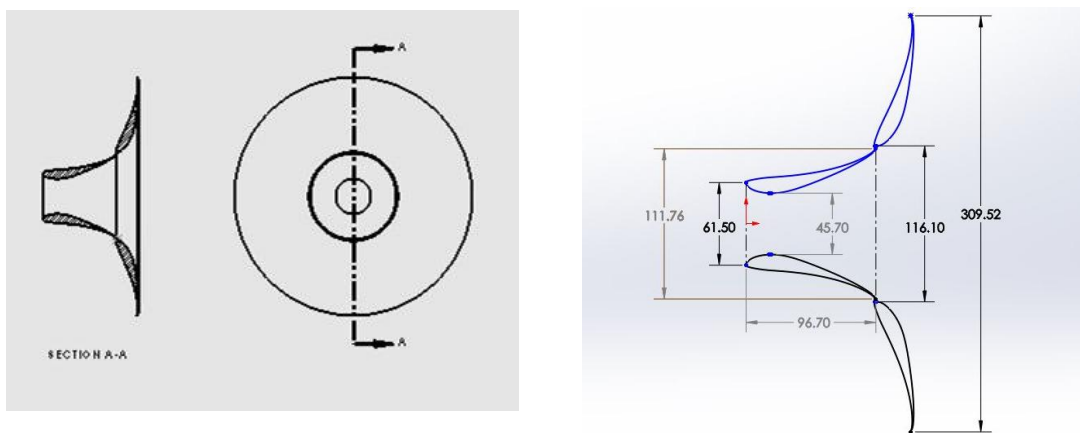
Multi-slot diffuser geometry (dimensions in mm)
